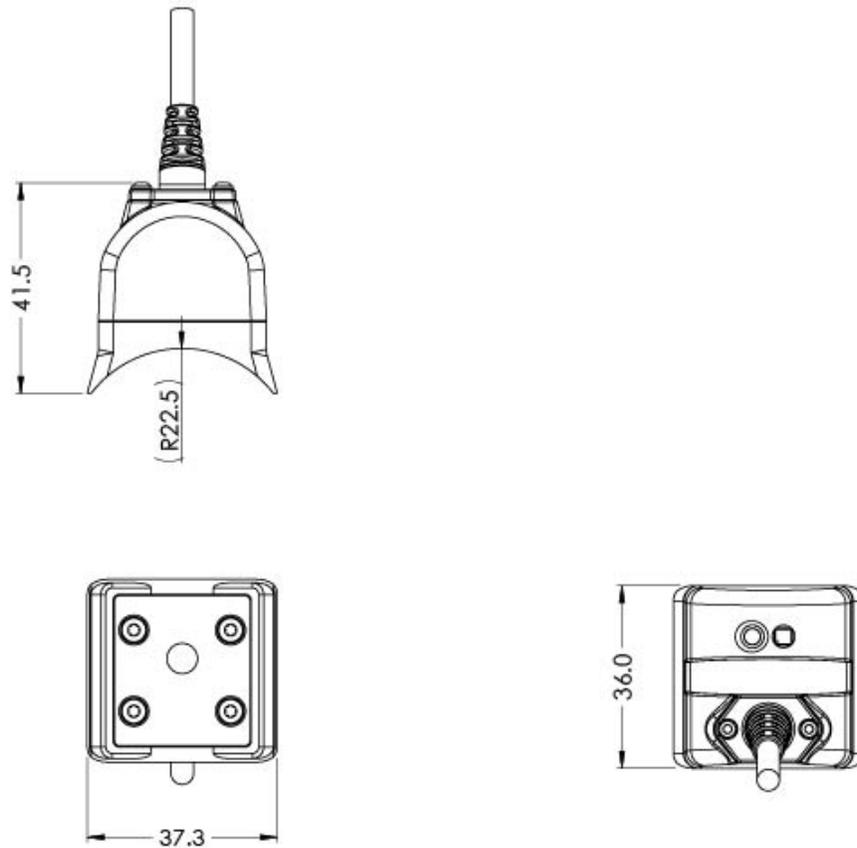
Stacklight Monitoring Sensors technical dimensions
